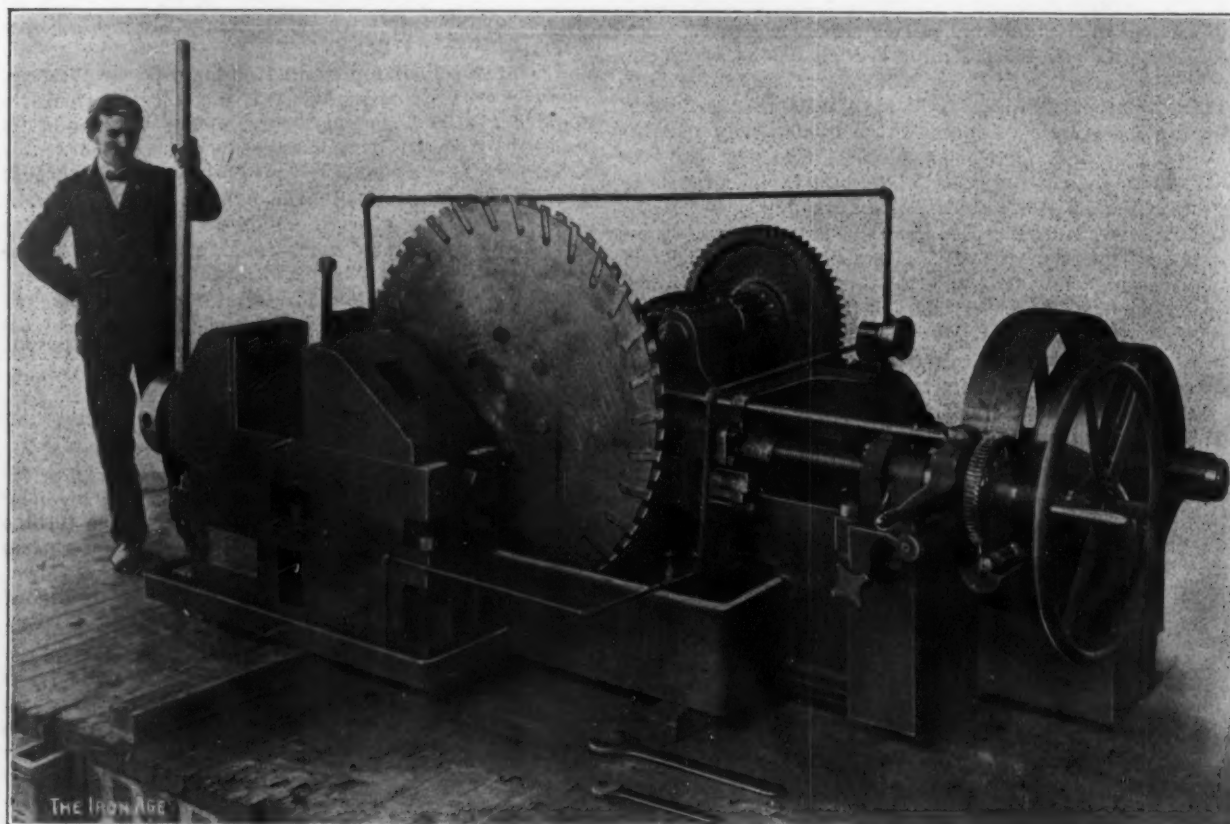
An Extra Heavy Saw Built by the High Duty Saw & Tool Company, Eddystone, Pa., for the American Locomotive Company.
